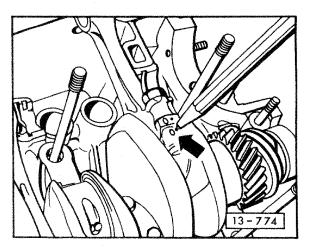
Mark matching connecting rod/bearing cover with cylinder
